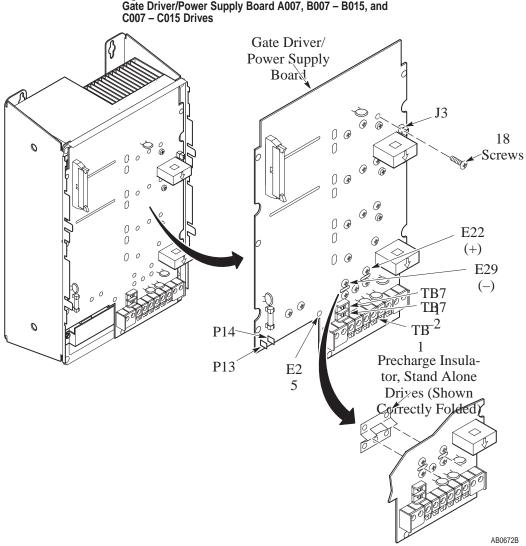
Gate Driver/Power Supply Board A007, B007 - B015, and
